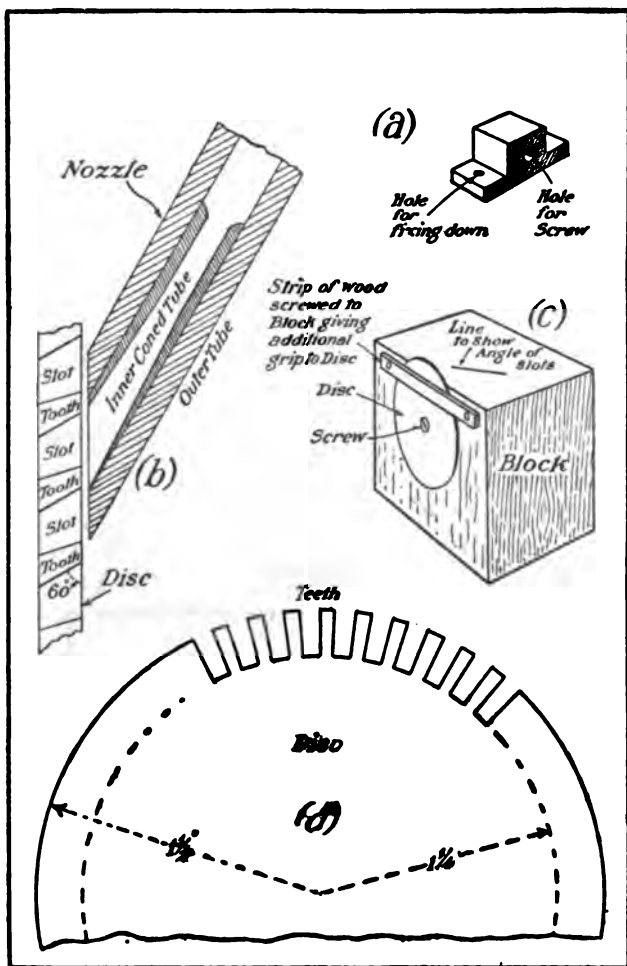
Details of steam turbine with vaned wheel. (a) Thrust block. (b) Section of nozzle. (c) Wheel disc mounted on block for filing. (d) Wheel with some vanes filed out.
